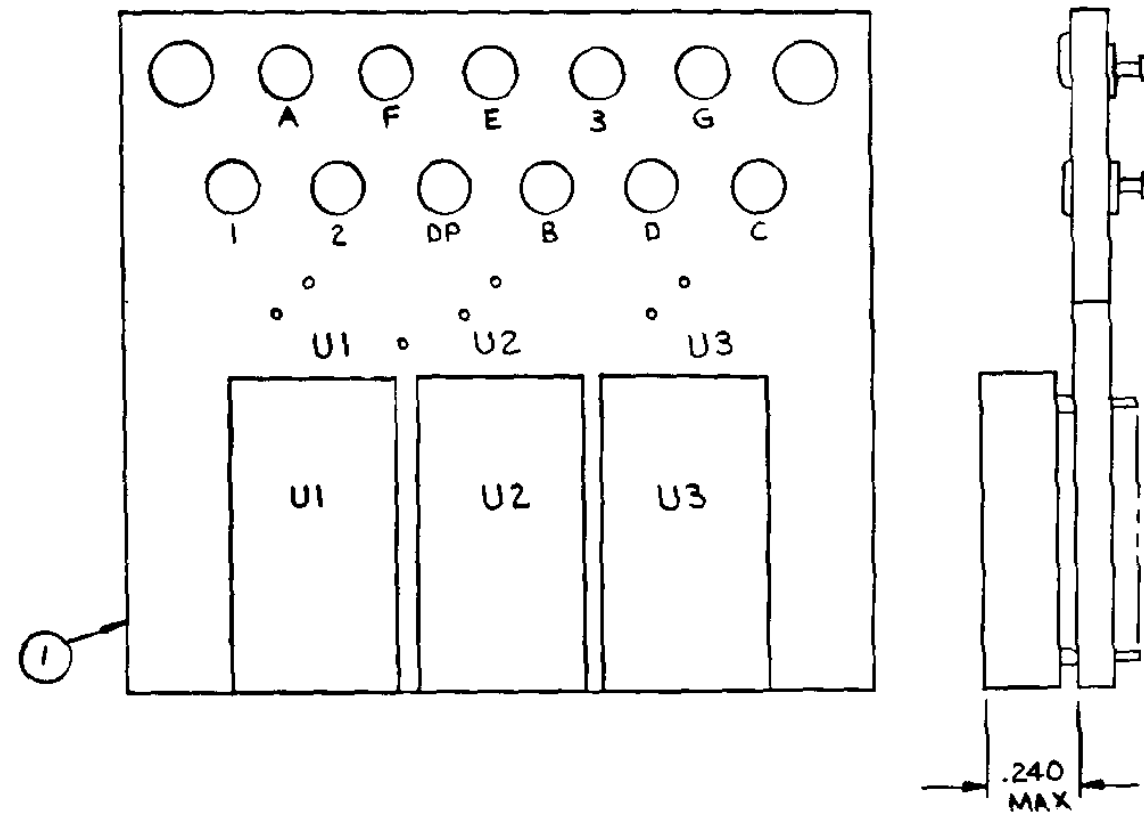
Time Display PCB (A20A1) Assembly Drawing
